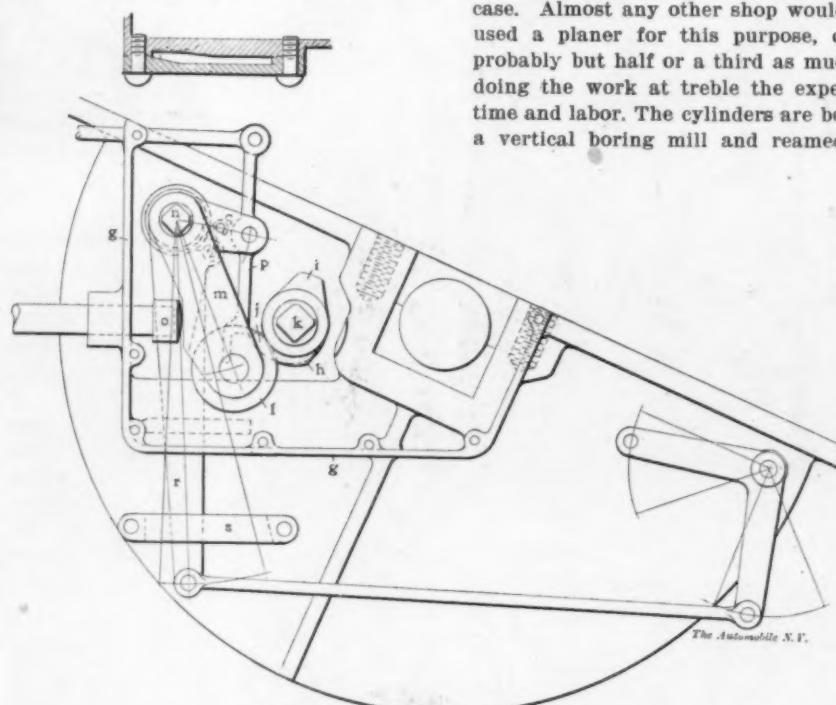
EXHAUST VALVE AND IGNITER GEAR.
